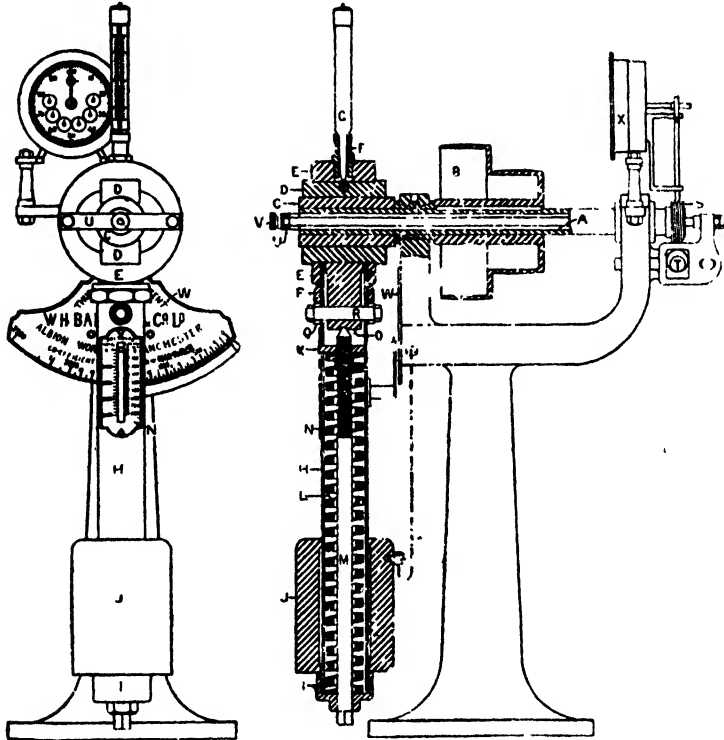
THE BAILEY-THURSTON OIL AND BEARING METAL TESTING MACHINE
